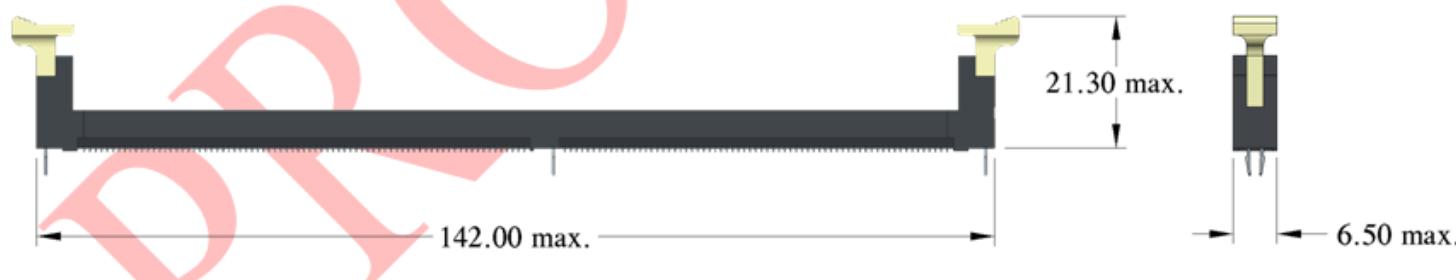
Surface Mount (SMT) Connector Socket Outline
